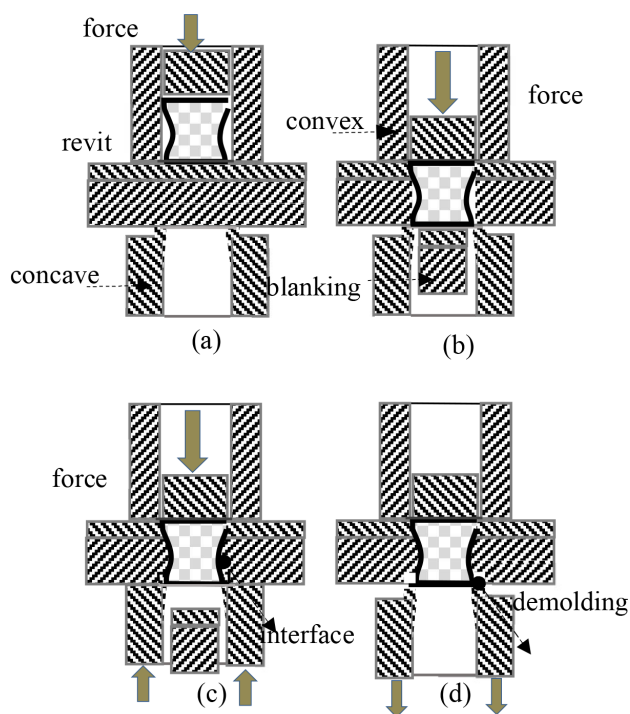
Principle of FSPR joining. (a) Workpiece pressing; (b) Punching nail embedding; (c) Extrusion forming; (d) Stripping.
